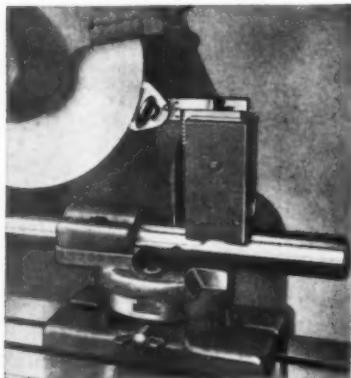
Nothing short of a dependable chaser grinding fixture will maintain screw thread production at its maximum efficiency. Note range of adjustments of fixture shown, including chamfer angle setting gage which eliminates guess-work.
